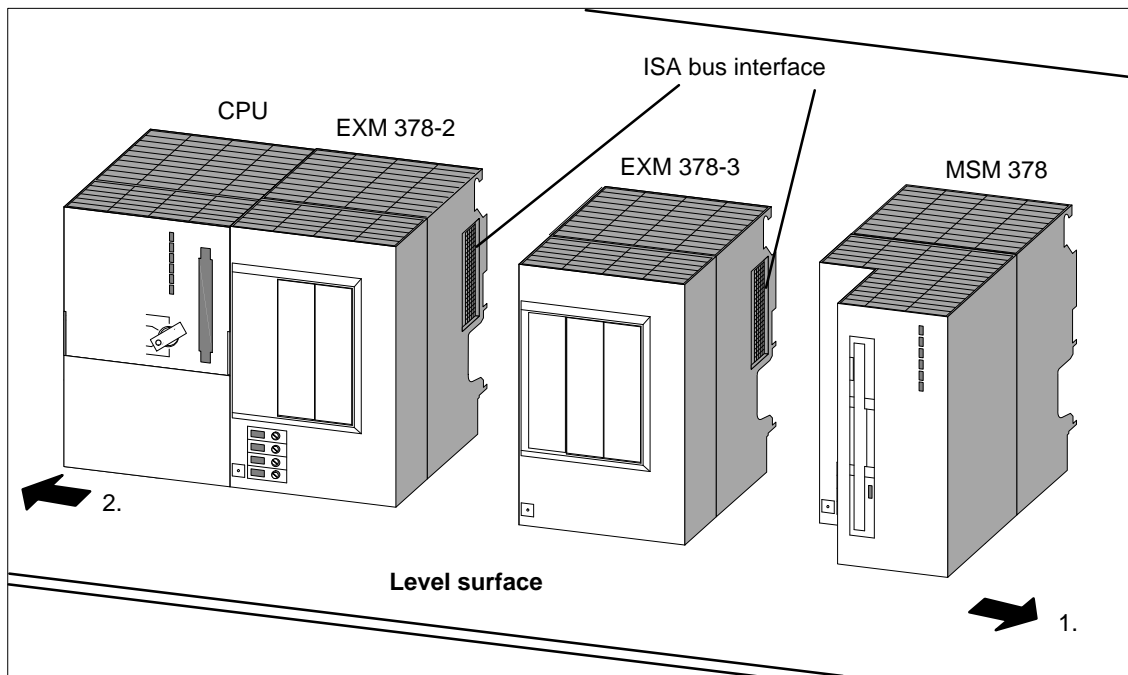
Separating a Module Assembly to Allow Replacement of Expansion Module EXM 378-3
